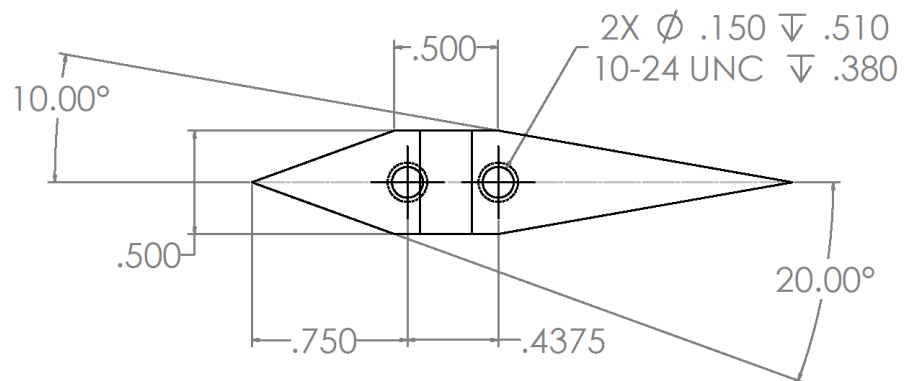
Drawing of Mach stem generator wedge model inner strut.
